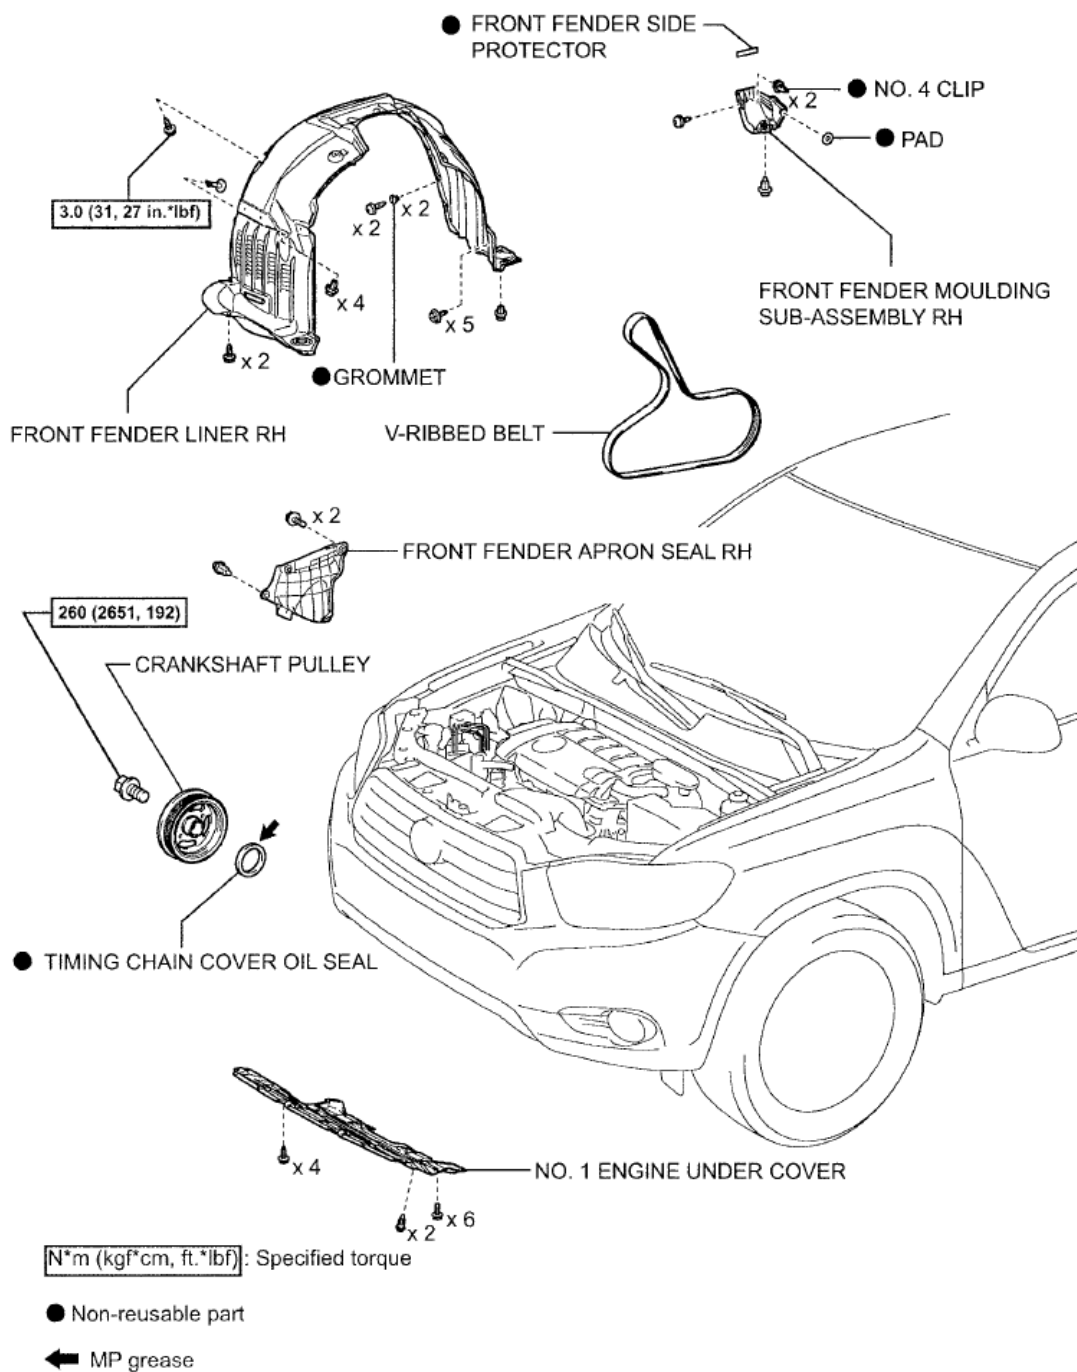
Identifying Front Crankshaft Oil Seal Components With Torque Specification
